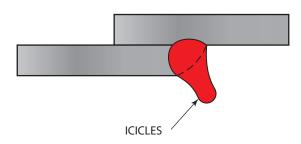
Overfilling the molten weld pool will result in drips of metal called icicles.
